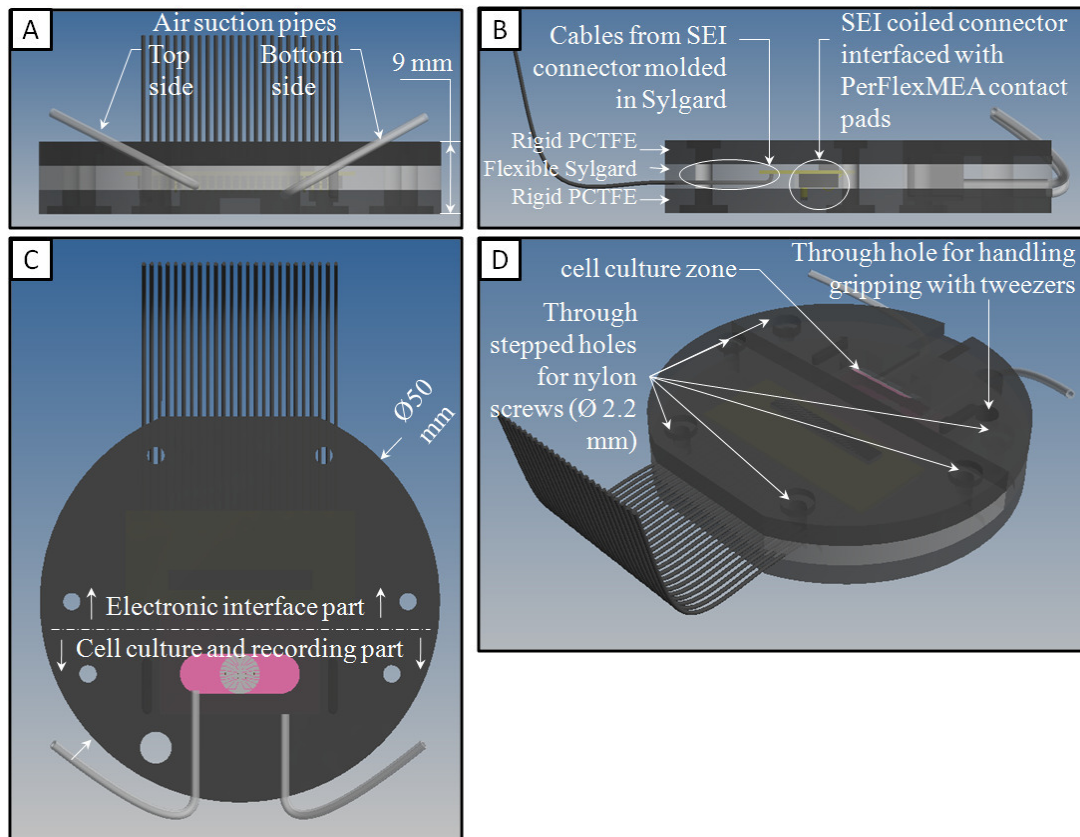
Assembled coin setup for housing the PerFlexMEA. The different views show some of the key dimension and design features of the coin setup. (A) Front view. (B) Side view. (C) Top view and (D) isometric view. The coin setup was designed to fit in a 60 mm Petri dish. Views were produced using Autodesk Inventor Professional 2011.
